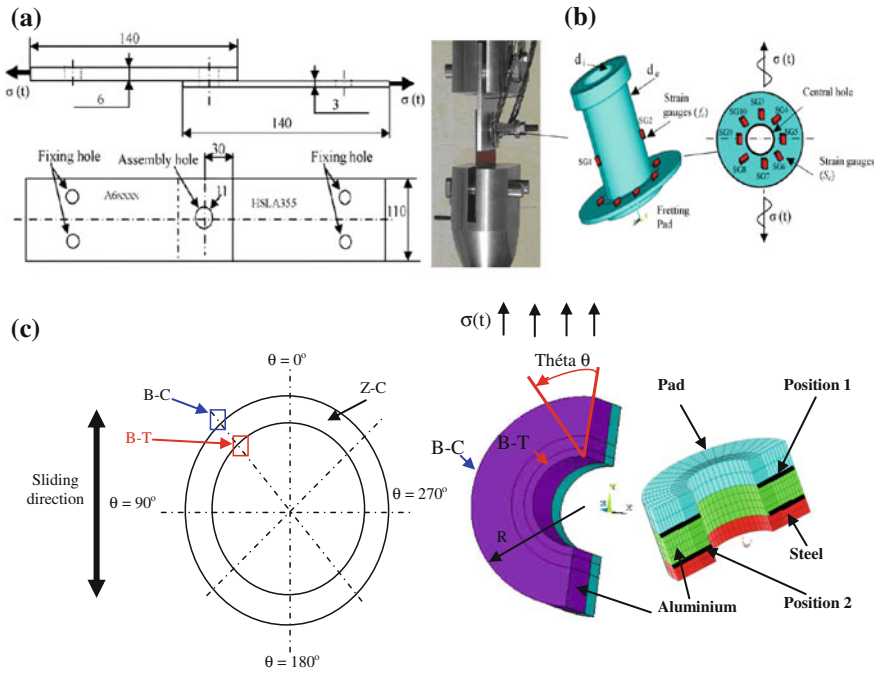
a Specimen geometry (all dimensions in mm), b schematic drawing of central part of the specimen used in fretting fatigue tests and the strain gauges and c nomination of the Cartesian coordinates, different planes and positive θ direction at a half of bolted assemblies
